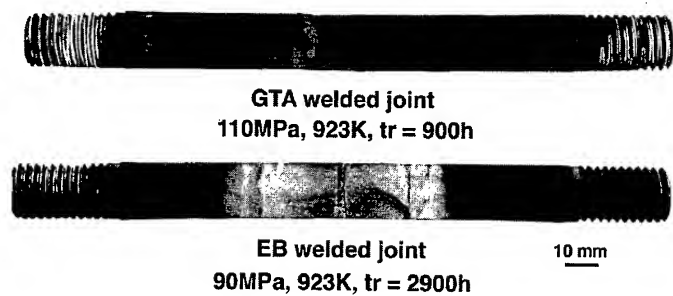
Profiles of the creep fractured specimens for GTA and EB welded joints.
